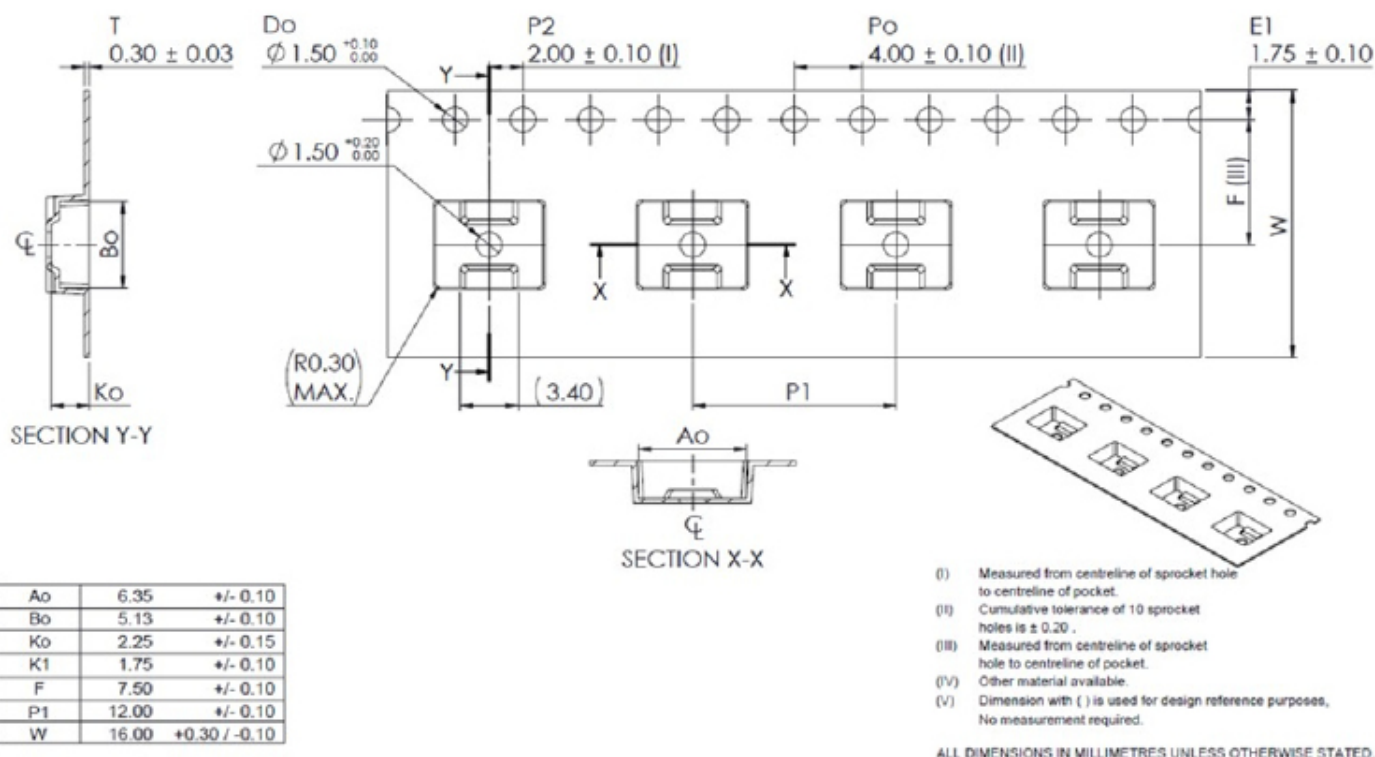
Tape and Pocket Drawing for SOIC-8 Package
